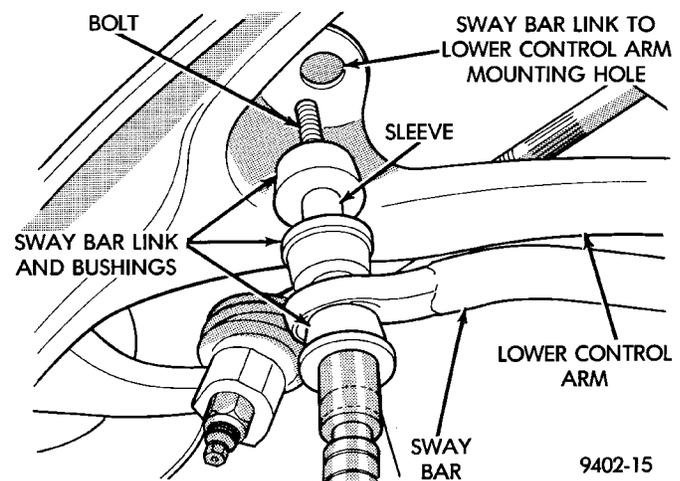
Assembled Stabilizer Bar Link And Bushings
